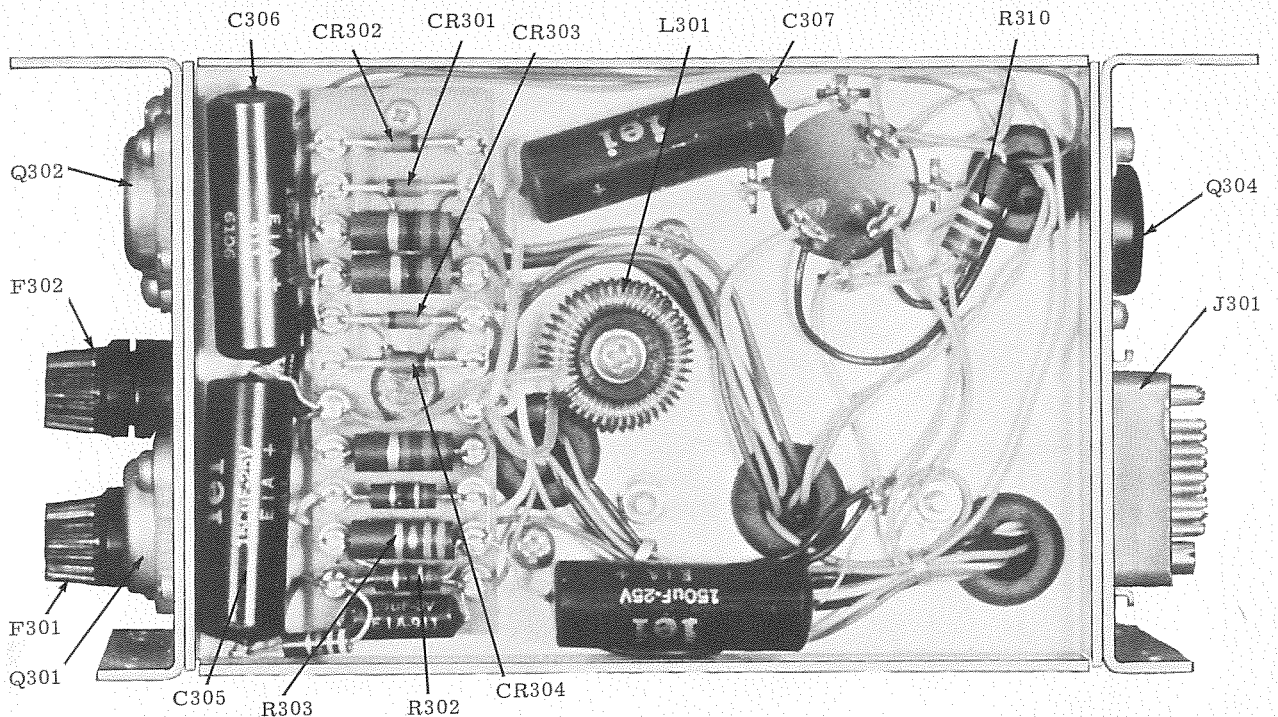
KS-501A POWER SUPPLY BOTTOM VIEW
